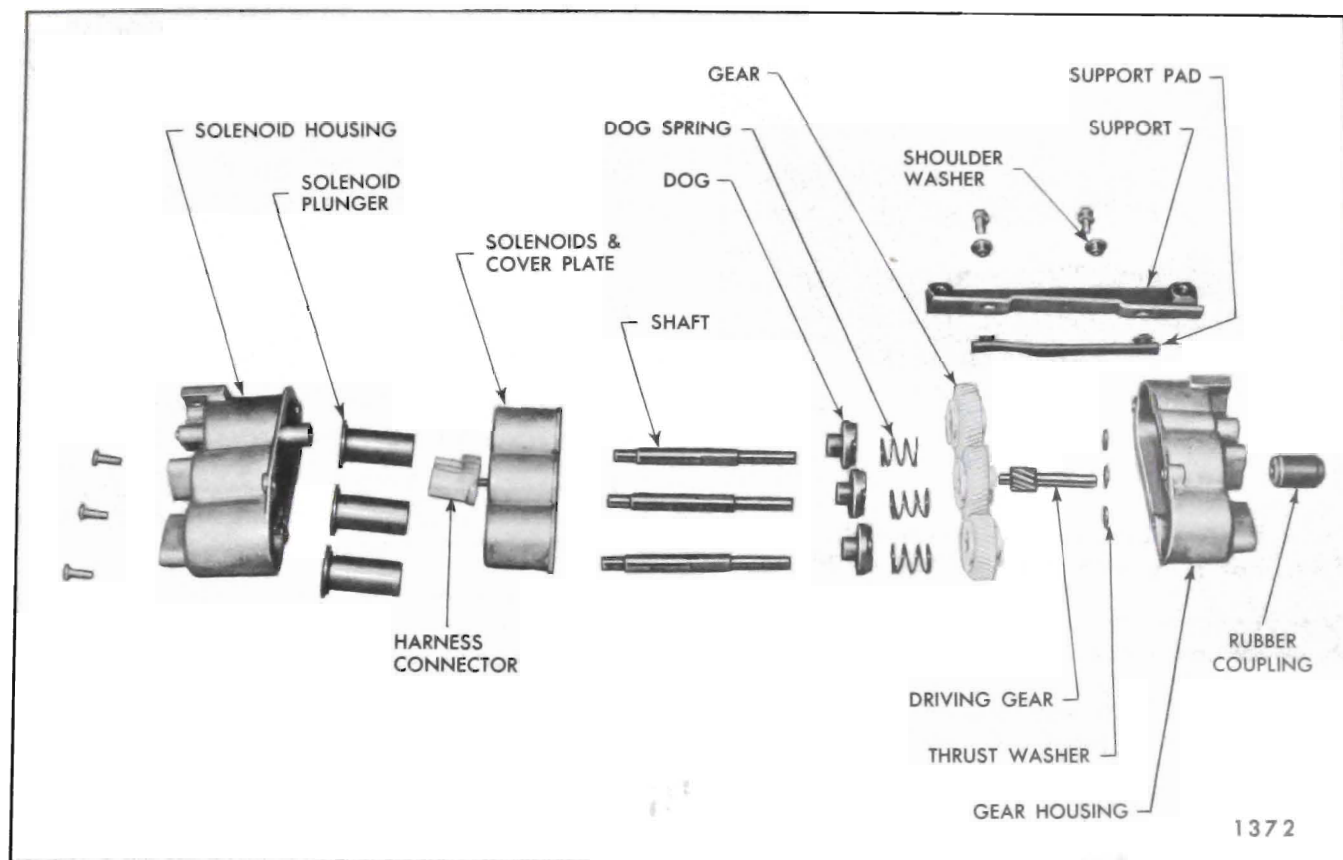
Six-Way Seat Adjuster Transmission - "B & C" Style
